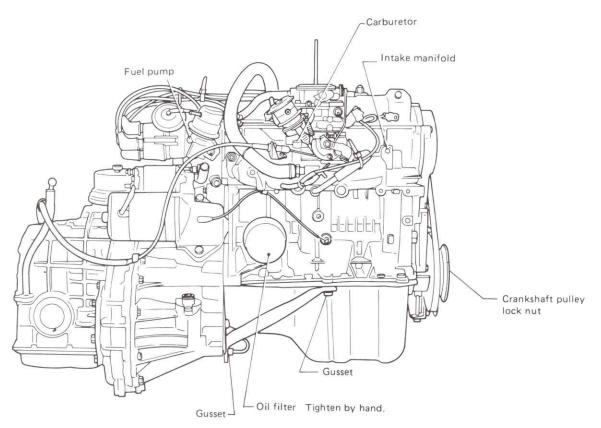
Engine external components viewed from rear (automatic version shown) (Sec 13)
